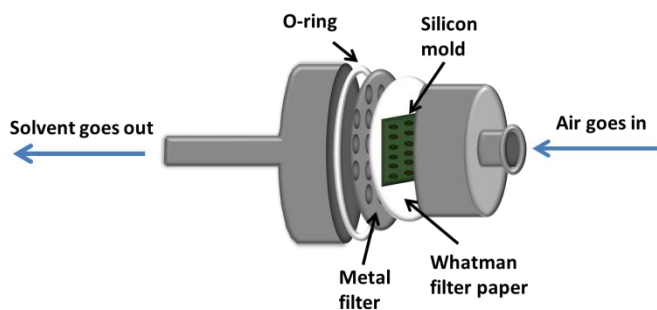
Assembly of filter holder showing positioning and layering of components
